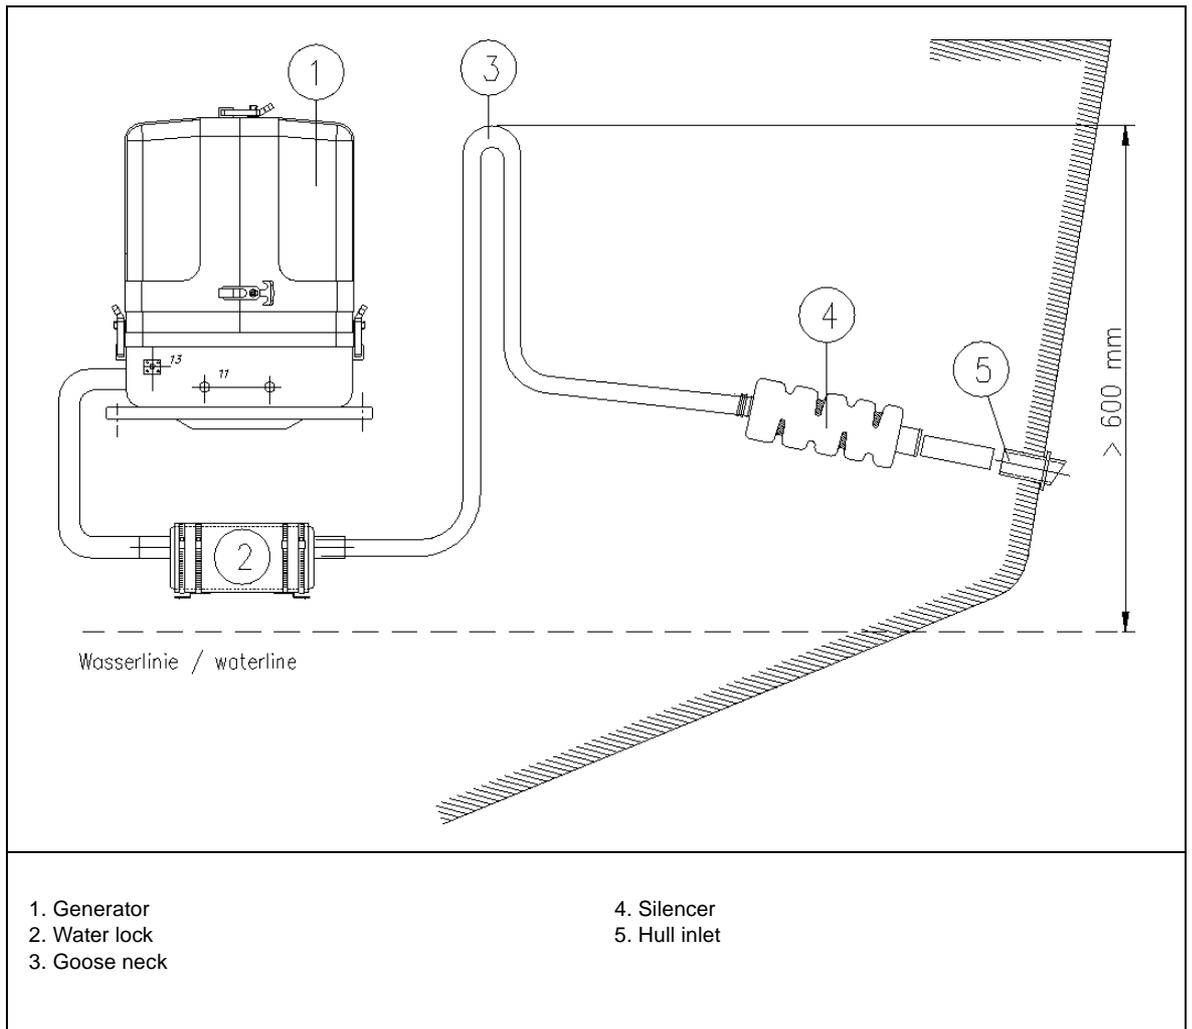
Installation stanrd exhaust system - example
